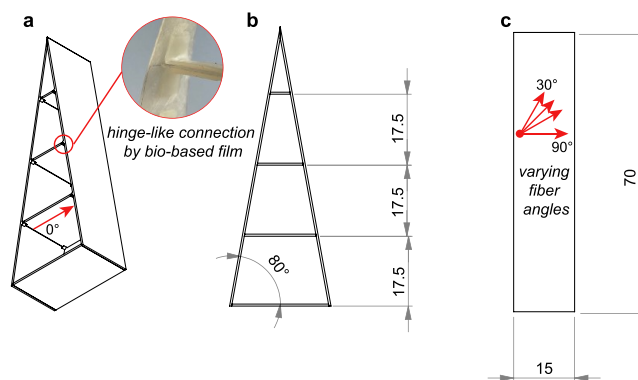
Technical drawing of a fin ray-inspired gripper. (a) Three-dimensional view, (b) plan view, and (c) side view. The red arrows in (c) show the fiber angles 90, 60, 45, and 30°. Dimensions are in mm.
